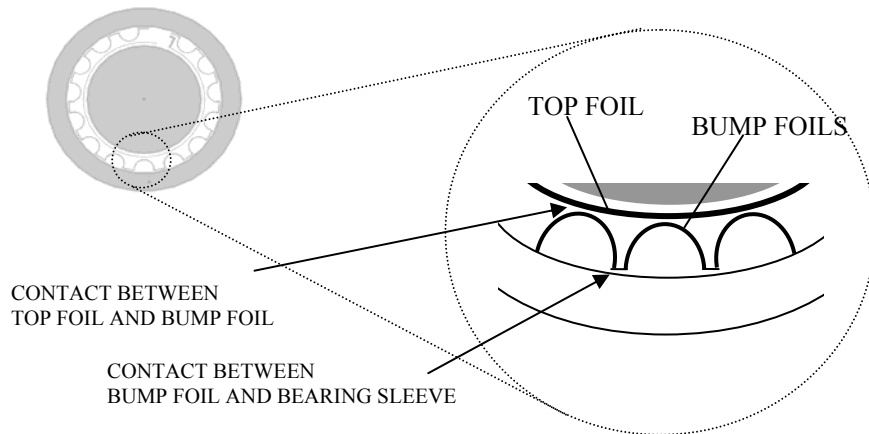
Schematic View of Coulomb Damping Source in Foil Bearings
